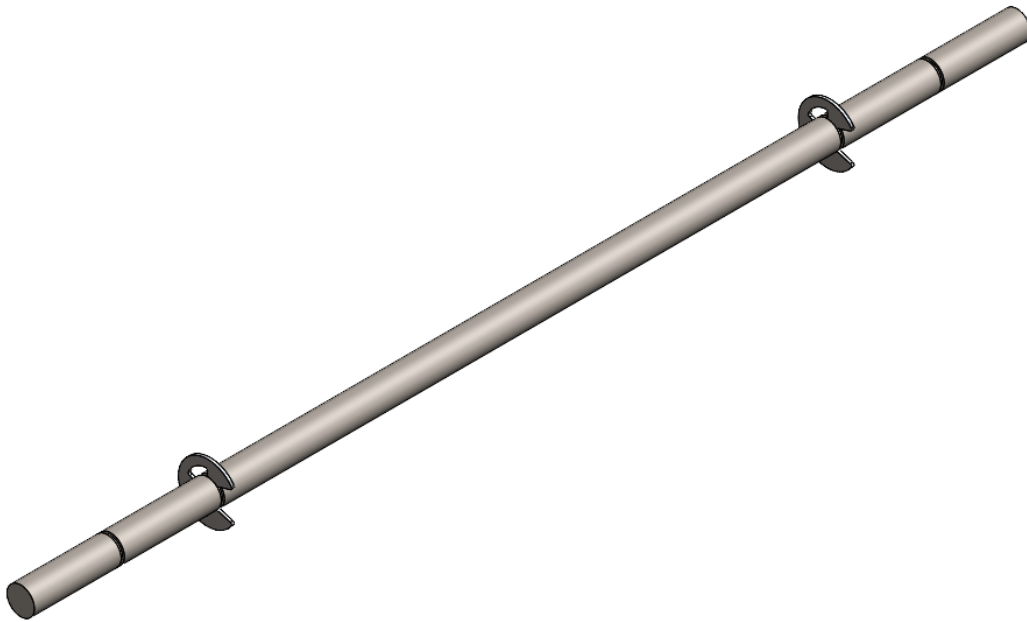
The 1/4" retaining rings assembled to the angle shaft.
